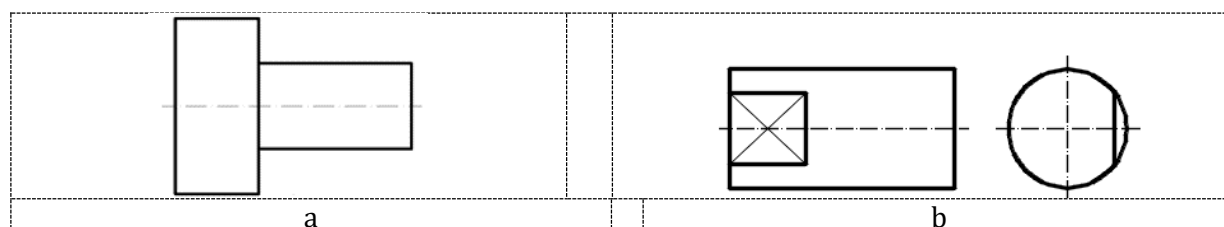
Stage of abstract conceptualization - full parts: (a) the part is drawn in one projection - view; (b) part with plane faces - the part is drawn in two projections, main view and left-hand view
